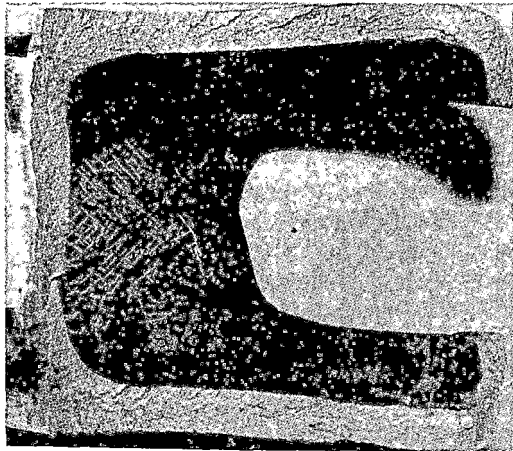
Metal section after fracture in low-temperature impact test. Note chevron pattern in metal surface indicating a brittle-type fracture
